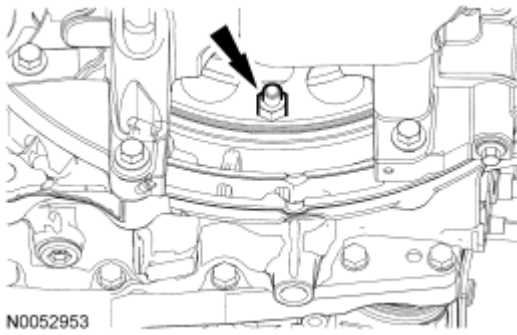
Locating Transaxle-To-Engine Bolts
